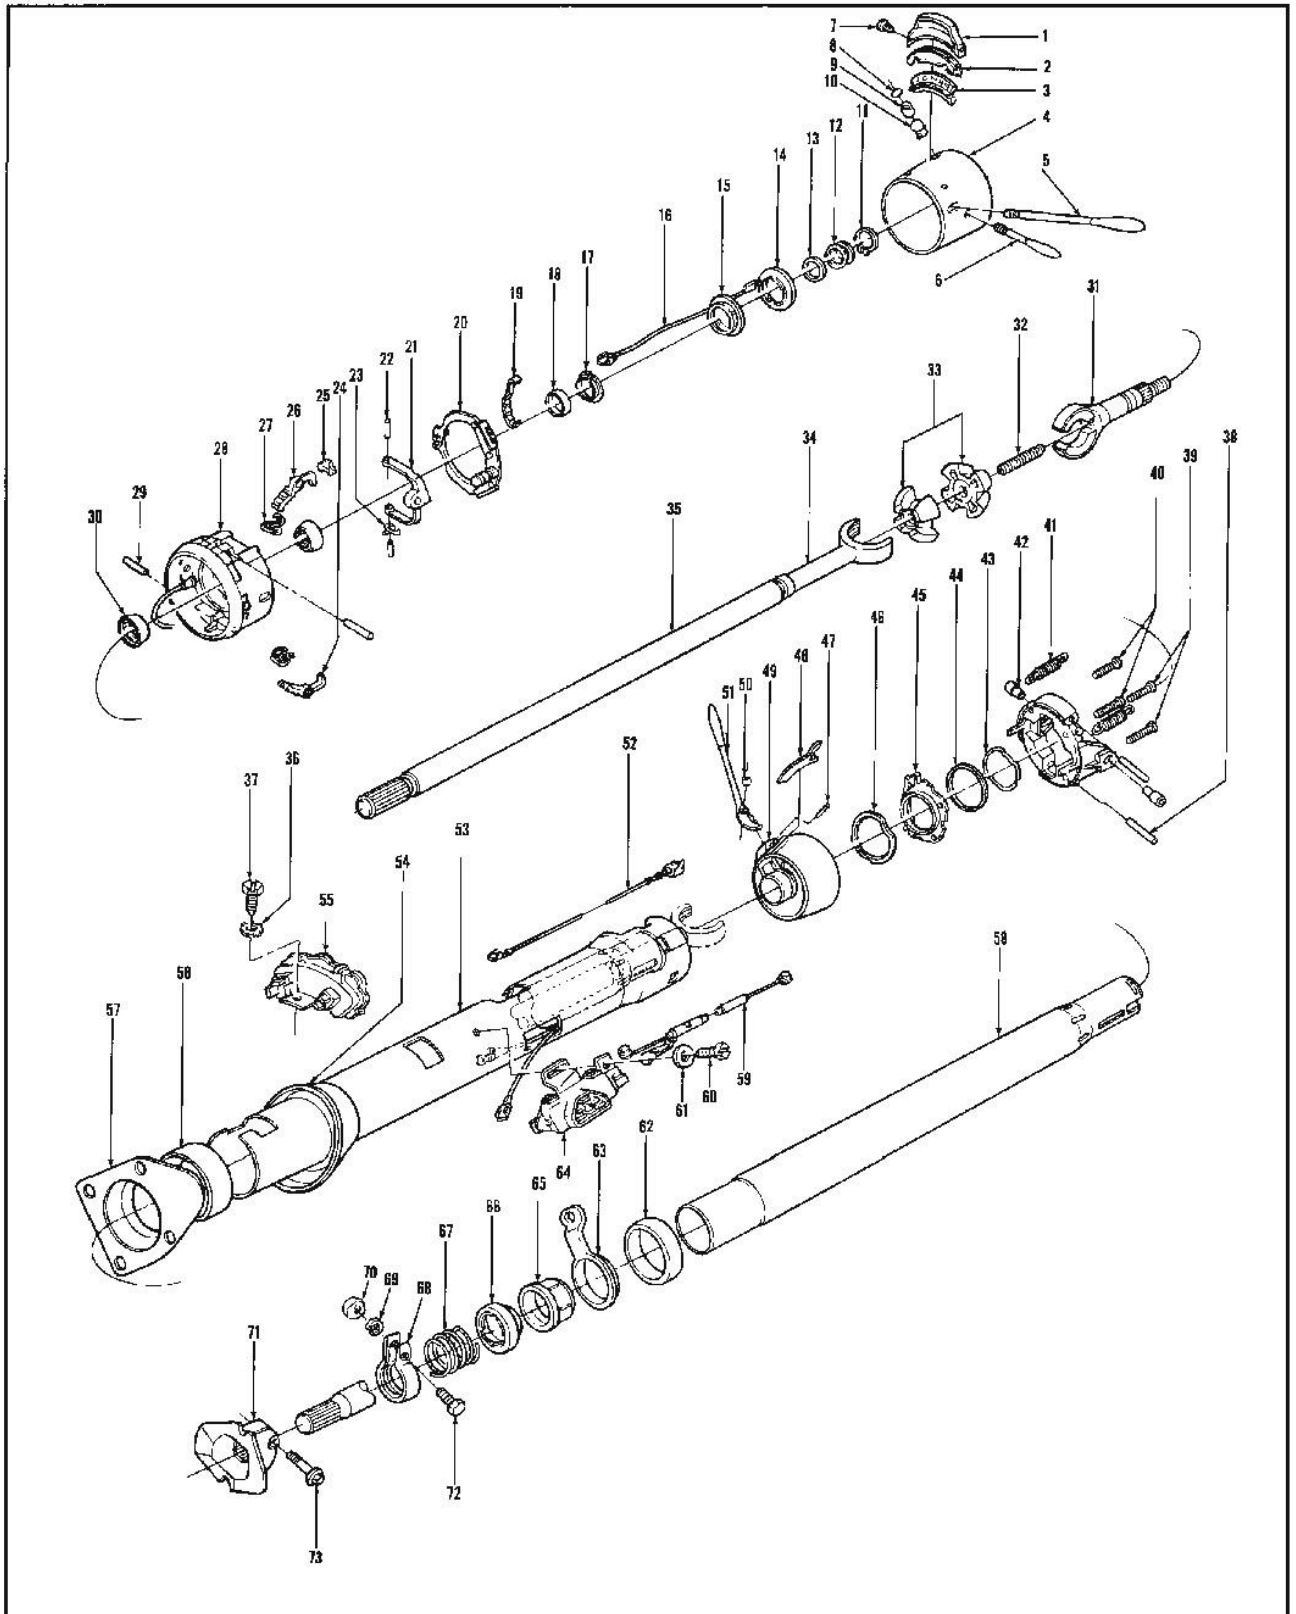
Steering Column with Tilting Wheel—Exploded View
